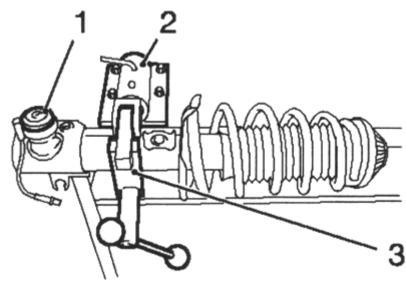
Setting special inst-rumenta on tube spring Rack:
